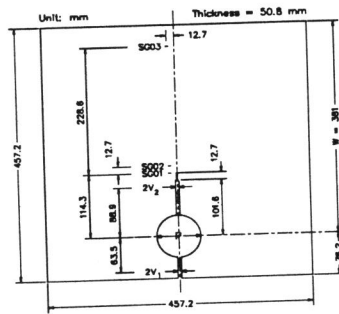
Geometry and Strain Gage Locations of CLWL-DCB Specimen
